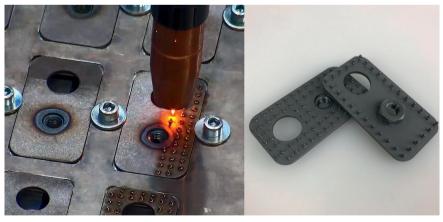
CMT welding allows pins of defined length and with different head shapes to be attached to the thread inserts © IK, IWF
